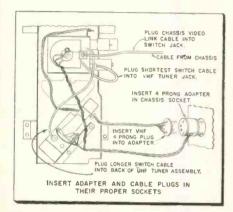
Cable assembly connections are changed in 1960-61 RCA's, as indicated here. Be sure to dress power cable to prevent shorting to the chassis.
